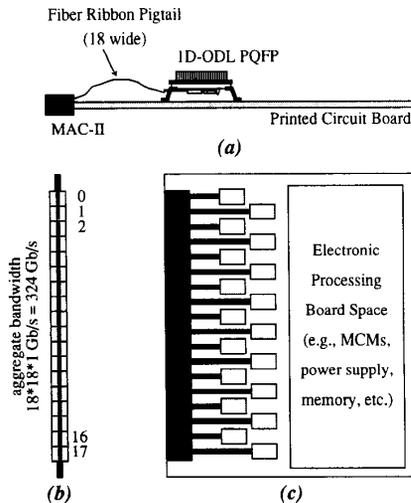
System physical design application example of the 1D-ODL. (PCB (a) side view, (b) end view, and (c) top view).
